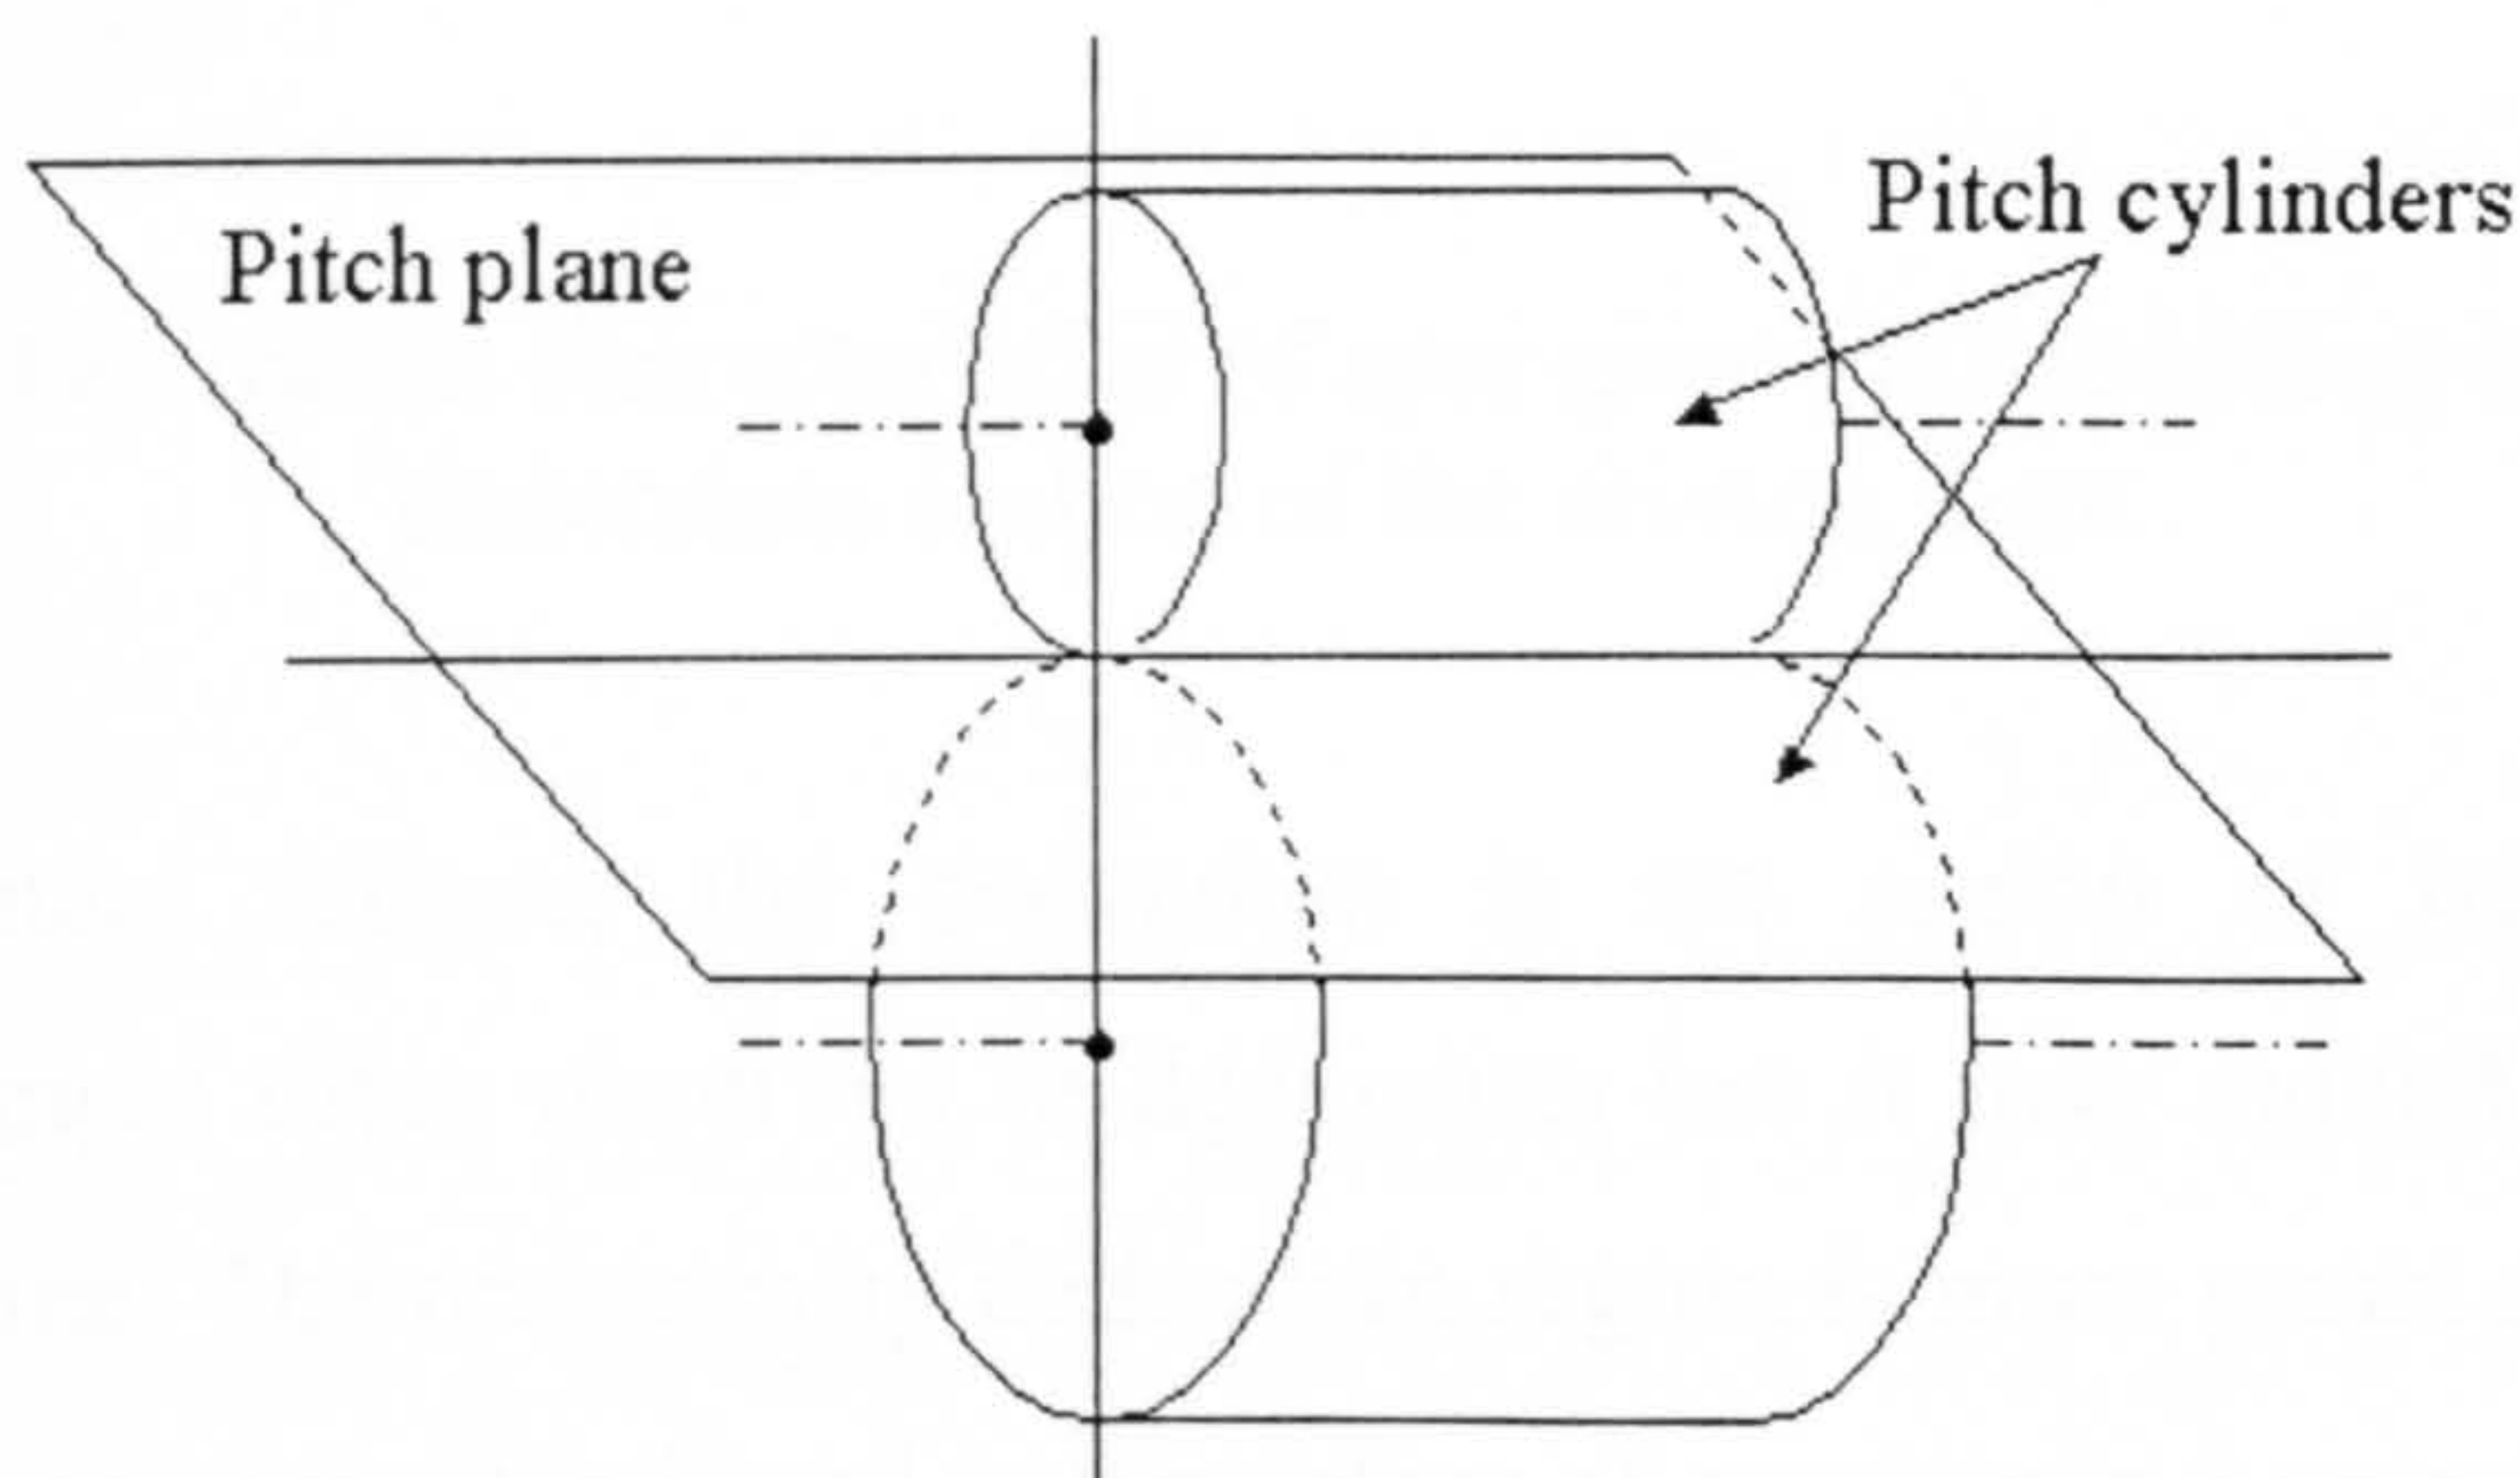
Pitch surfaces are cylinders for spur and helical gears.
